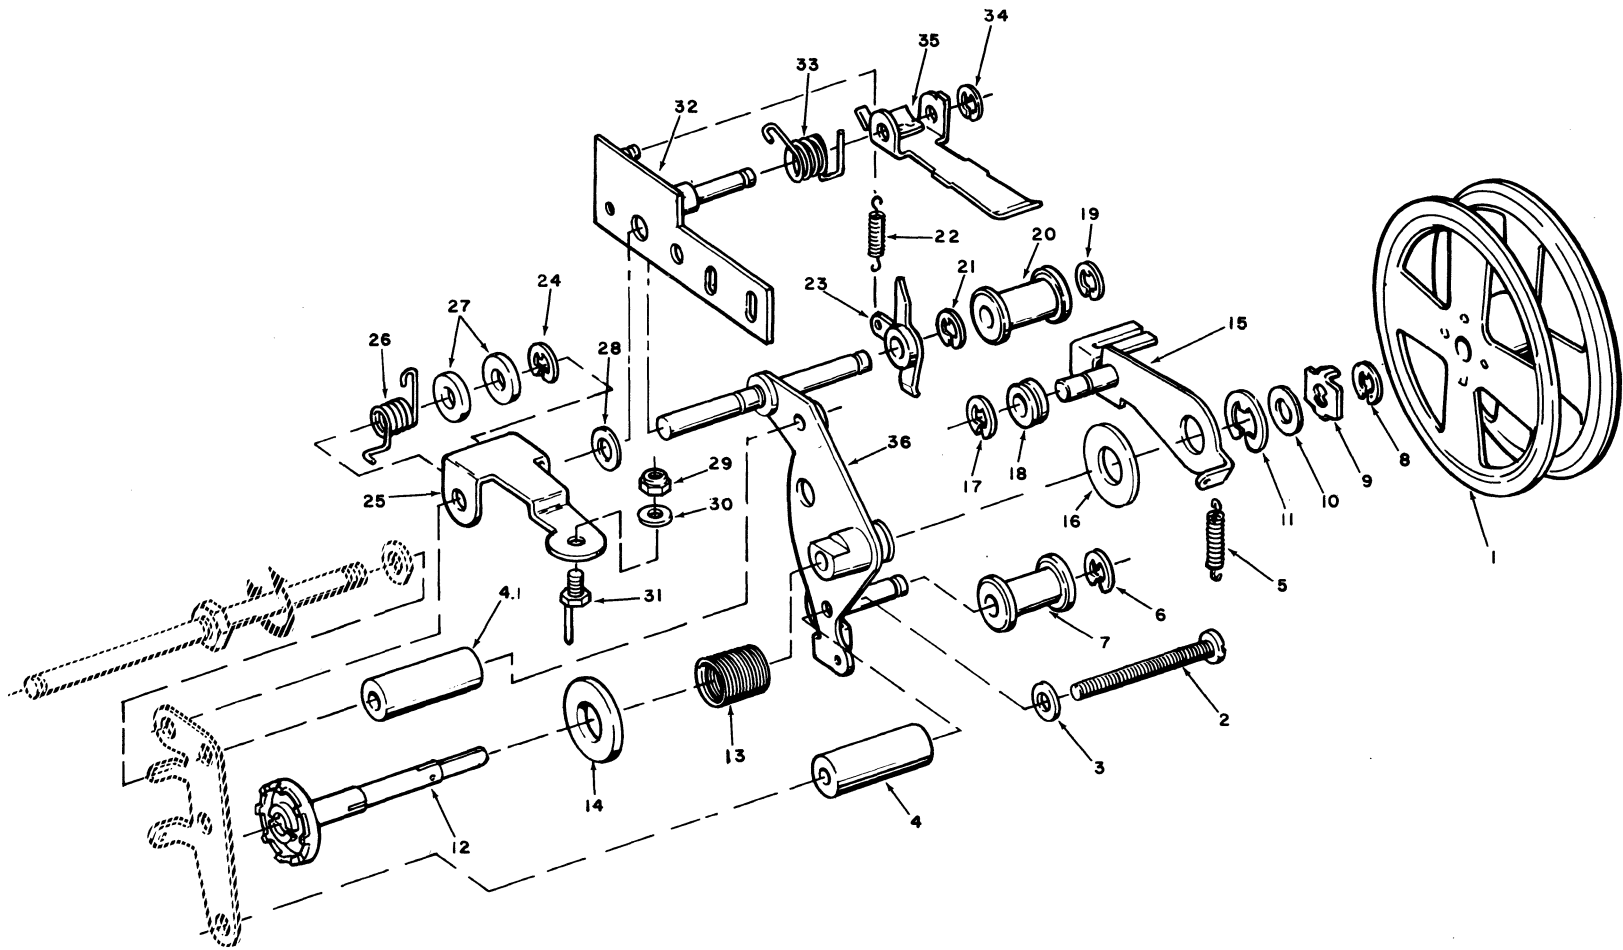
D-7. R.H. ribbon feed assembly, exploded view.
